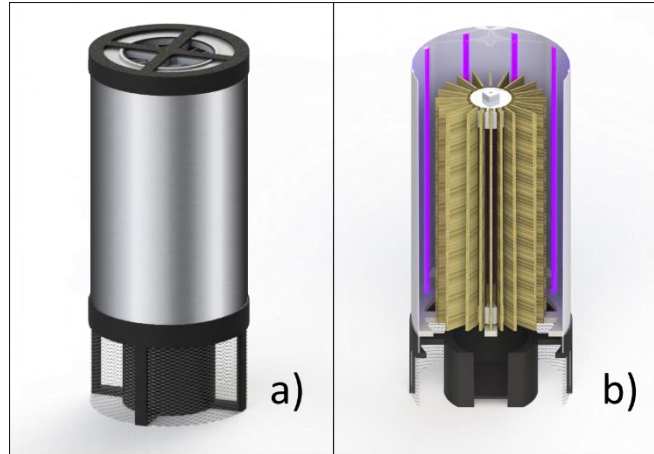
(a) CAD drawing of the prototype assembly. (b) Cross section of the prototype.
